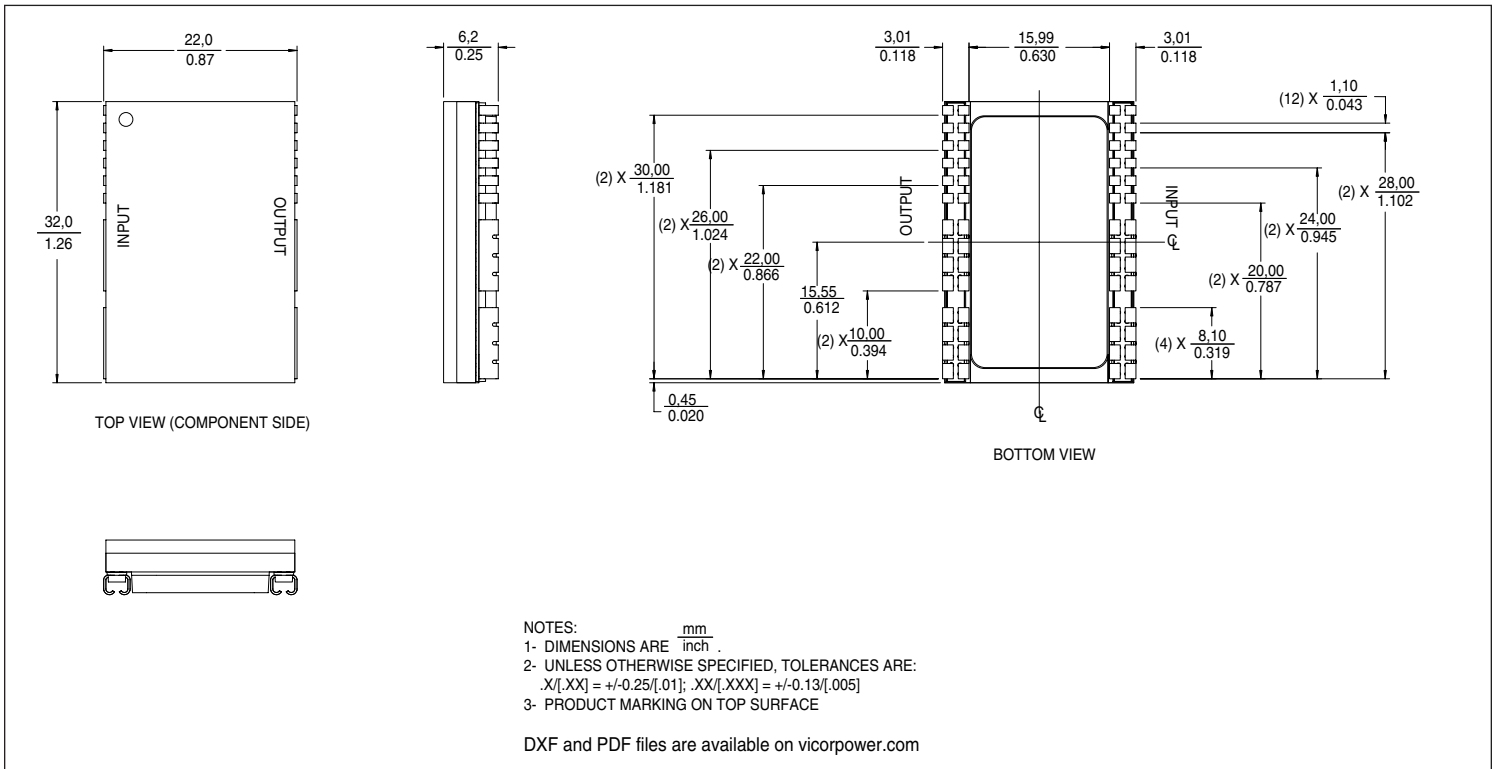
PRM J-Lead mechanical outline; Onboard mounting
